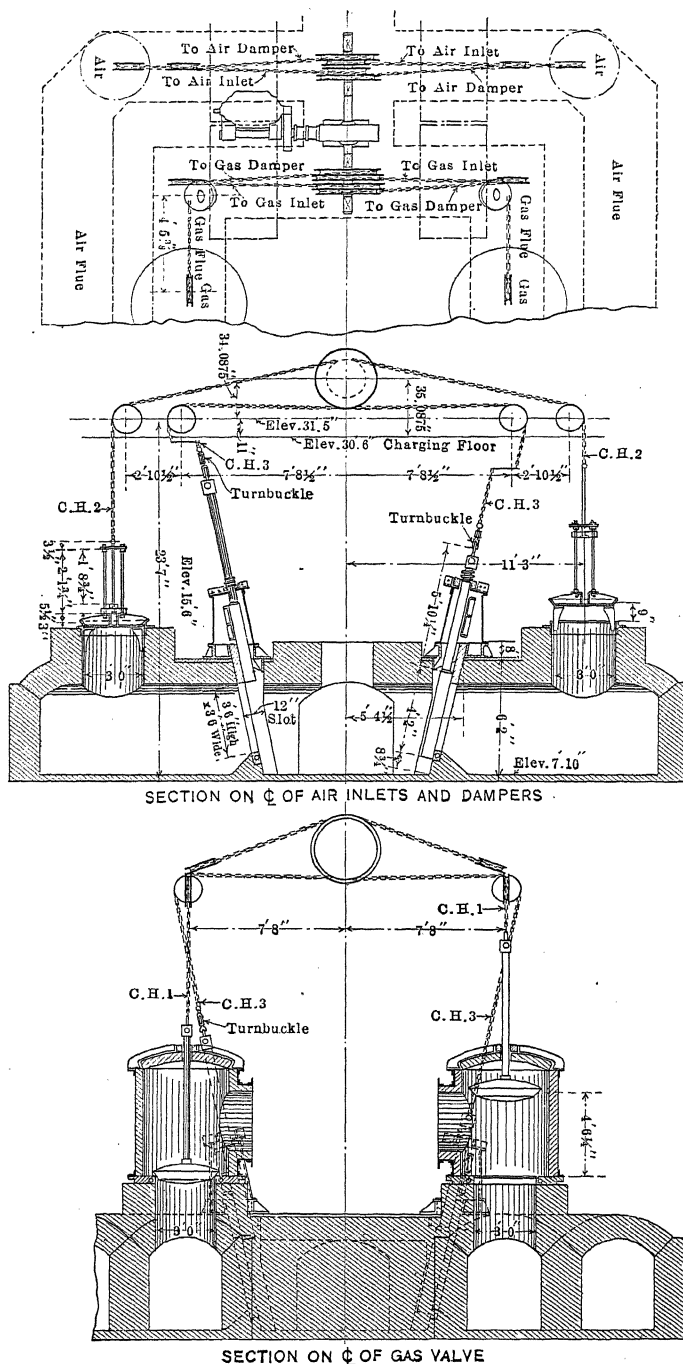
ARRANGEMENT OF KNOX PATENTED REVERSING VALVES.
